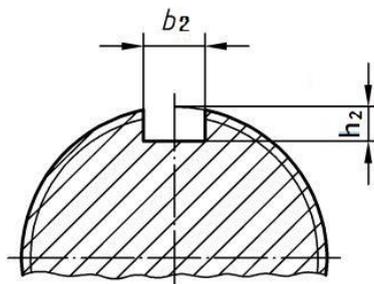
GROOVE DIMENSION WHEN DIRECTLY LOCKED TO THE SHAFT
